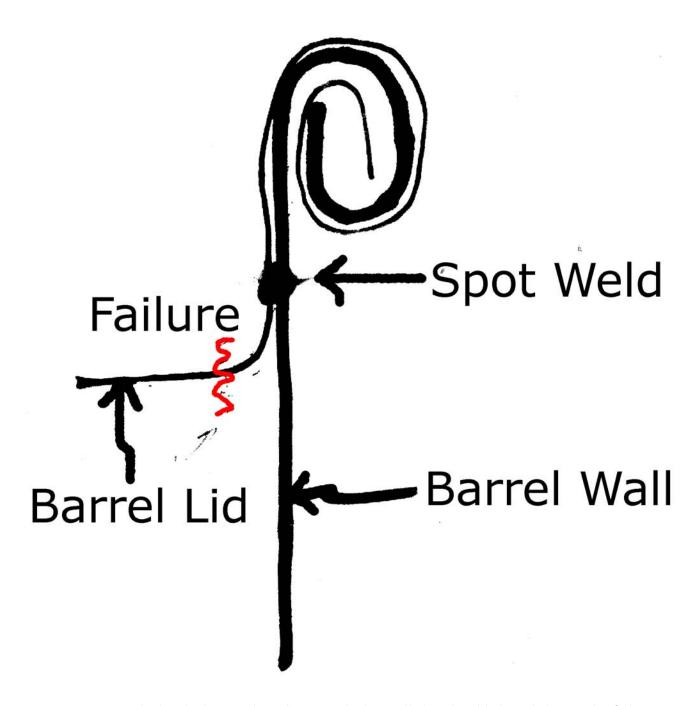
Rough sketch showing barrel seam, which is rolled and welded, and the nearby failure.
